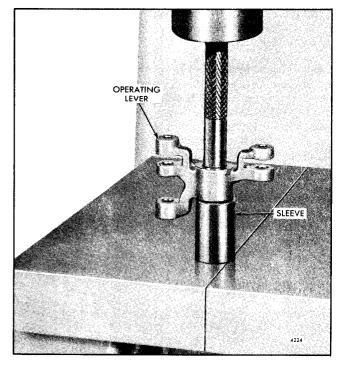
Removing Control Link Operating Lever Bearings using Tool J 8985
